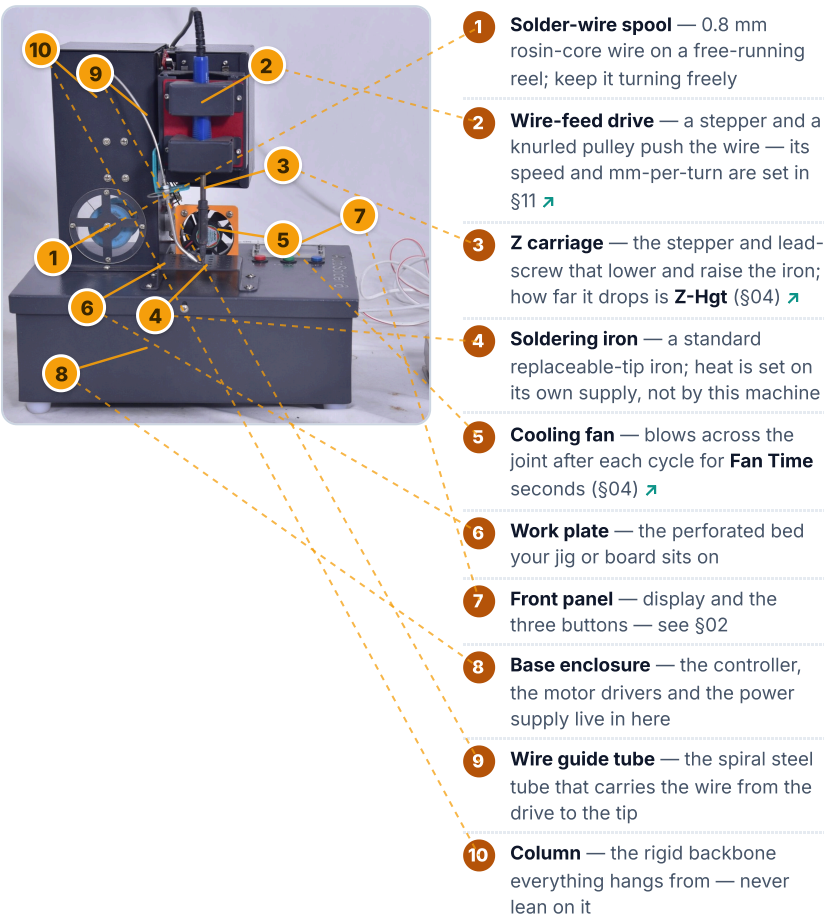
AutoSolder 6, front view. The machine is a single rigid column: wire goes in at the top, the iron comes down at the bottom.
